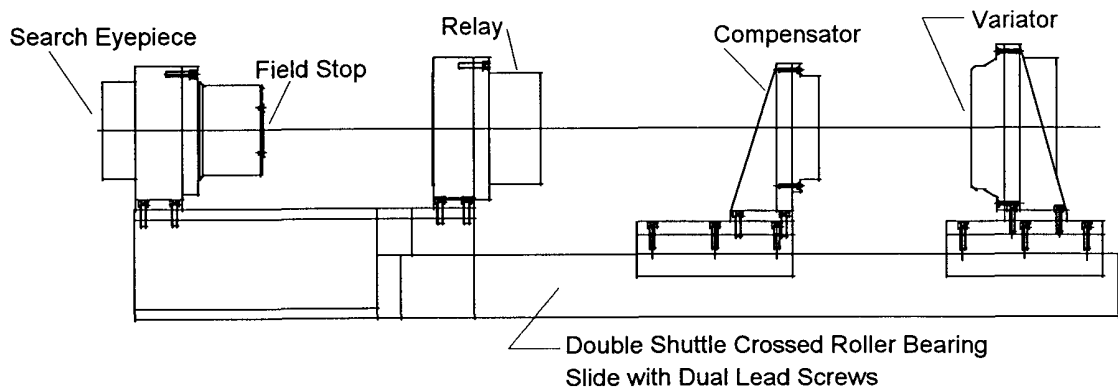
Variator and Compensator Shuttles Share a Set of Crossed Roller Bearings
